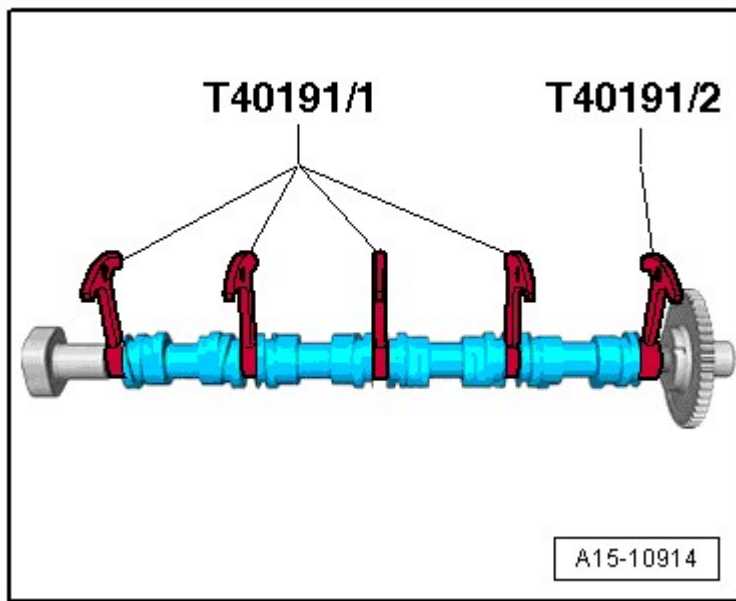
Transferring Self-Made Markings From Old Camshafts To New Camshafts
